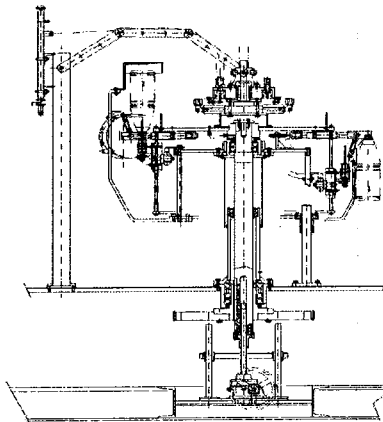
Main drum part ASS'Y of Automatic Bottle Air Rinser
